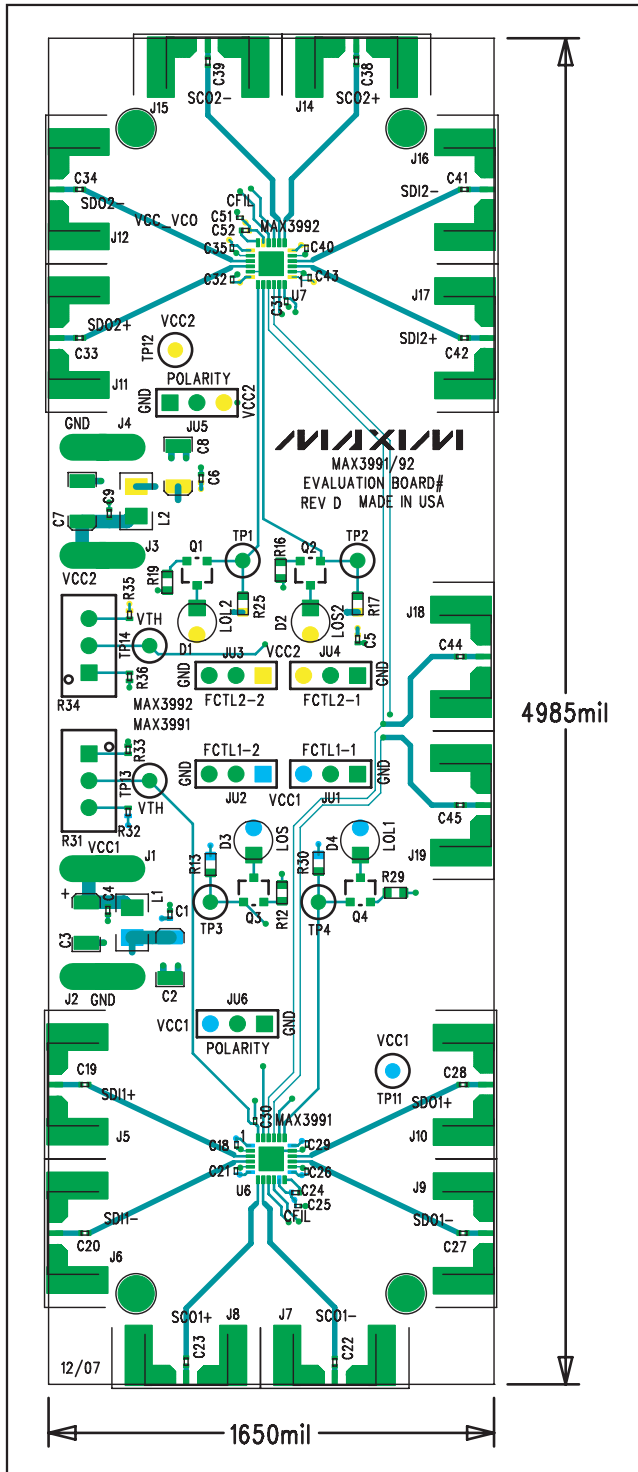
MAX3991/MAX3992 EV Kit PCB Component Placement Guide—Component Side
